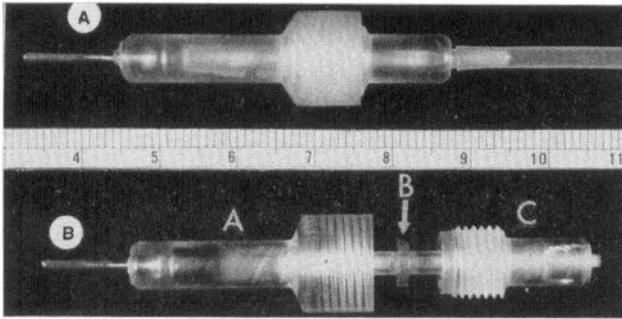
Watertight swivel joint for plastic tubing shown assembled in *A* and partially disassembled in *B*. Part *A* is housing; part *B* is flange in midportion of cylinder that fits snugly within housing; part *C* is cap that engages flange when joint is assembled. Scale in centimeters.
